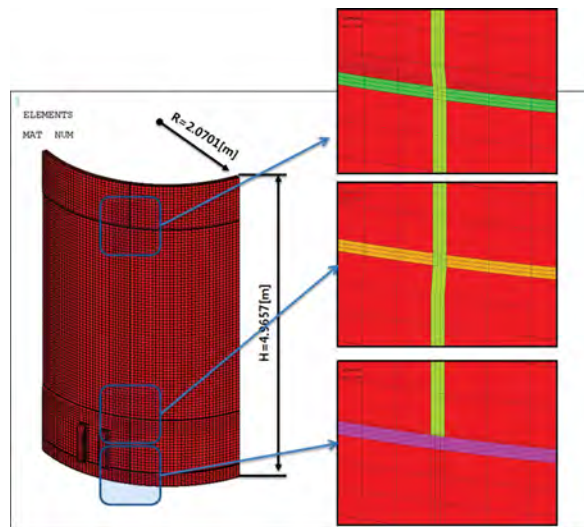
Welding Areas of Core Support Barrel
